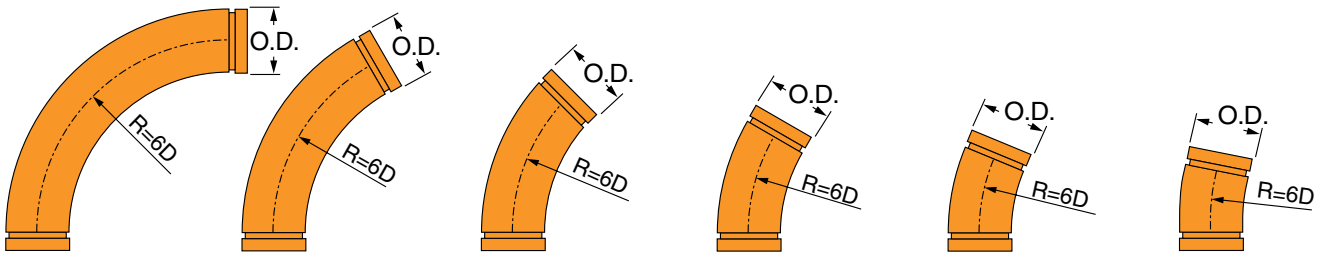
D, 90° Elbow Fig. 7057-6D, 60° Elbow Fig. 7051-6D, 45° Elbow Fig. 7058-6D, 30° Elbow Fig. 7052-6D, 22½° Elbow Fig. 7053-6D, 11¼° Elbow
